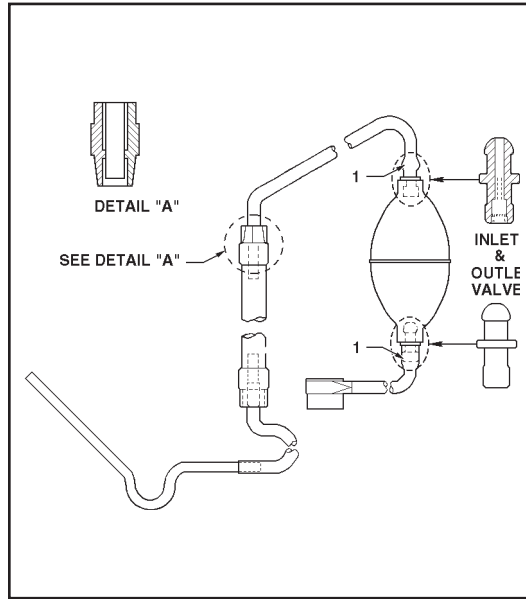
FYRITE Sampling Assembly; Locating Inlet/Outlet Check Valves.
